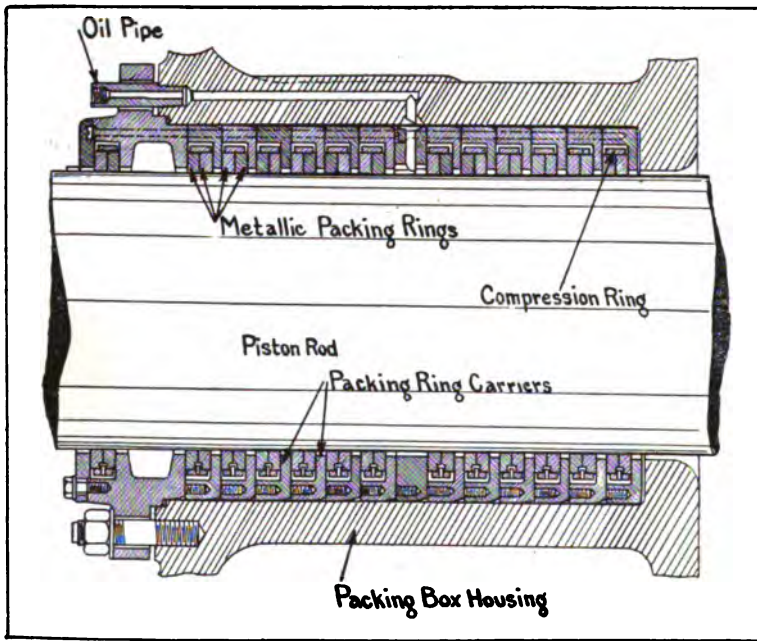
Diagram showing construction of metallic piston rod packing used on double-acting Augsburg-Diesel engine.
